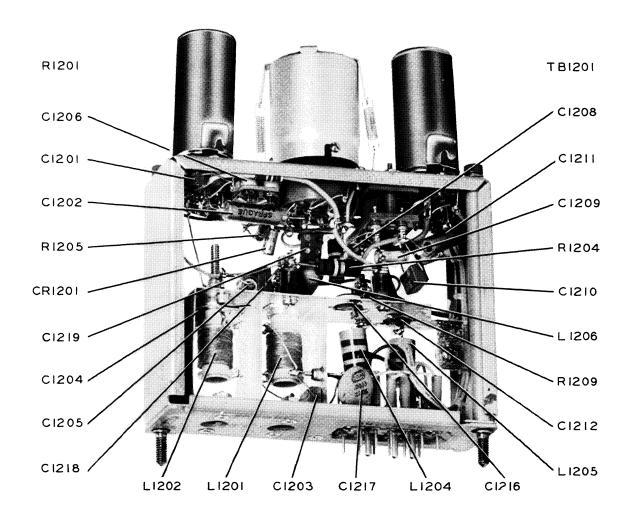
Transceiver 618S-1, 250 Kc Oscillator, Left Side View
